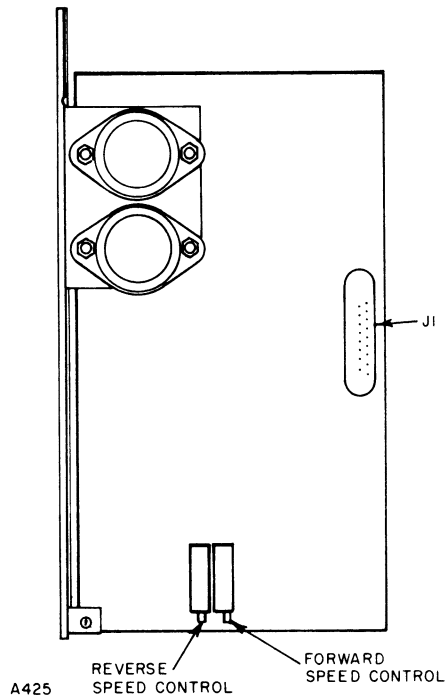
Location of Tape Speed Adjustments on the Motion Control Board
